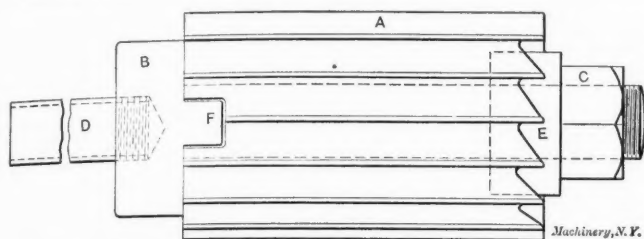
Mandrel and Handle with Hollow Mill Mounted for Hardening.
